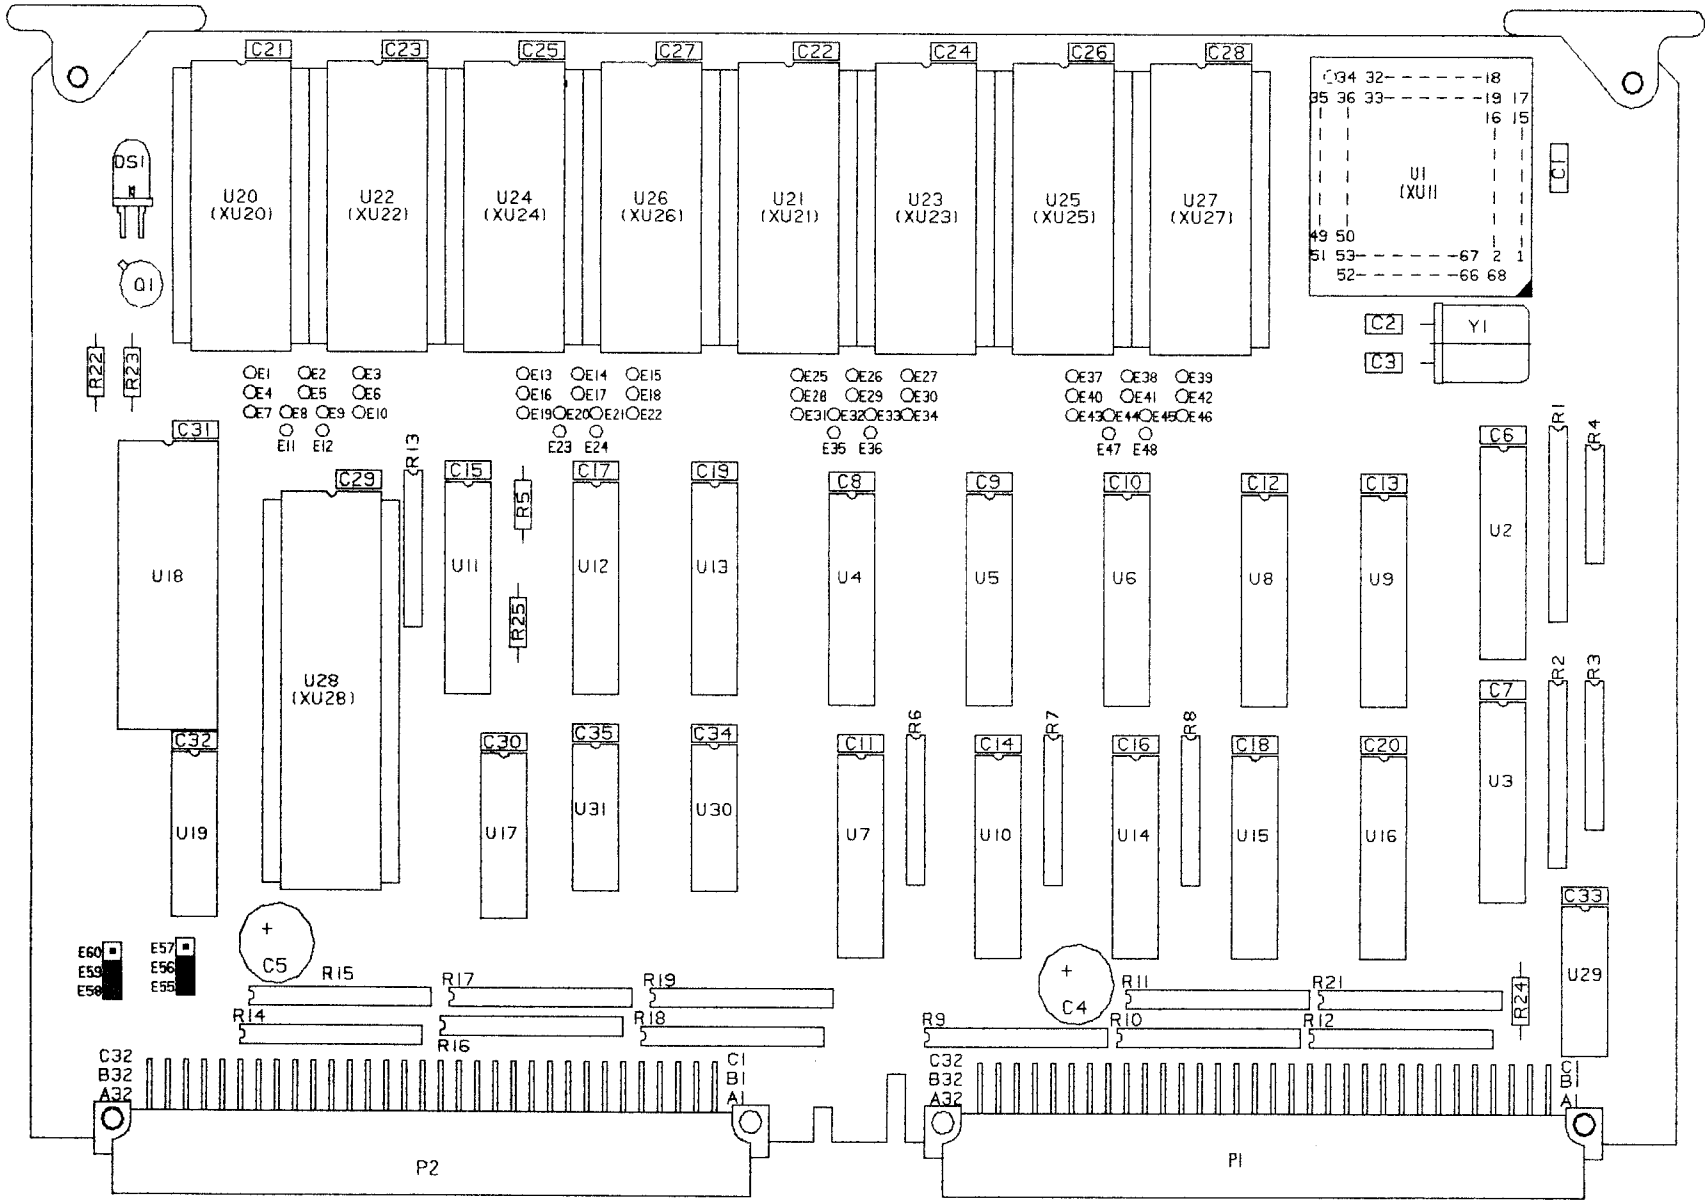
Decoder PWB Assembly A7 (10133-2450, Rev. E)
